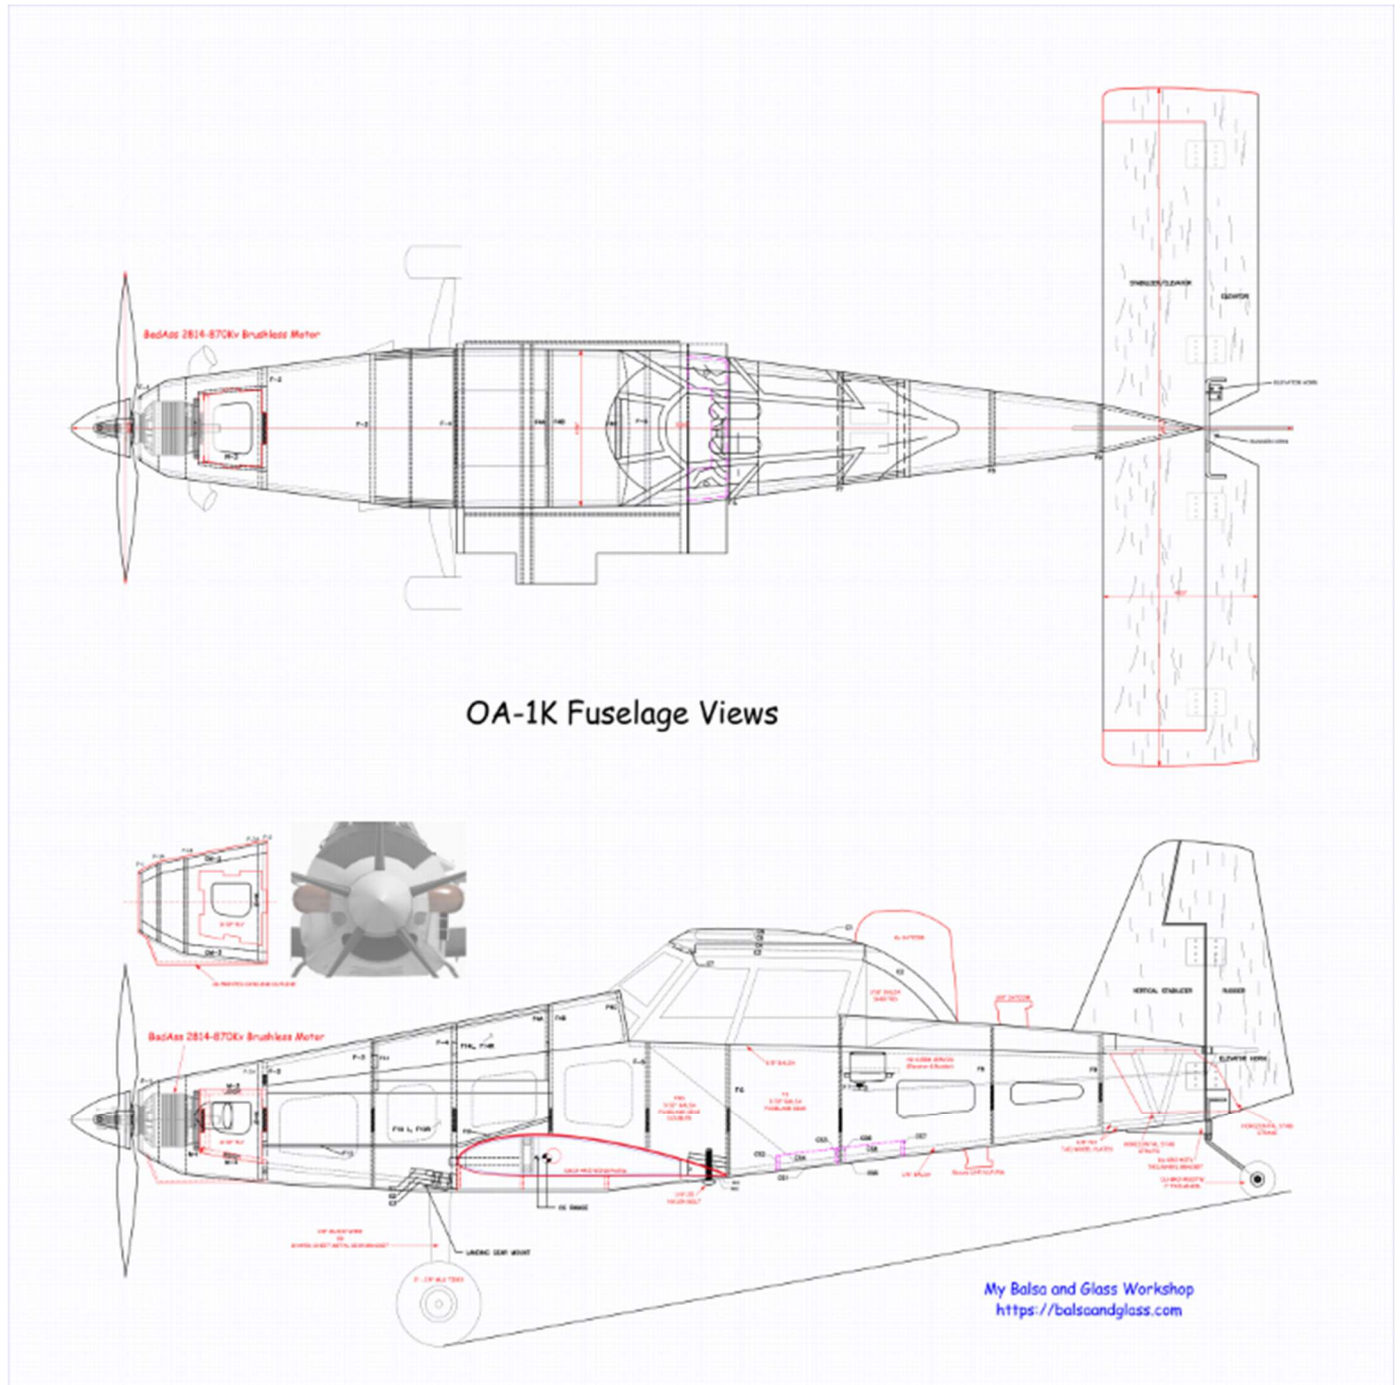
OA-1K Fuselage 2D CAD Plan Views
